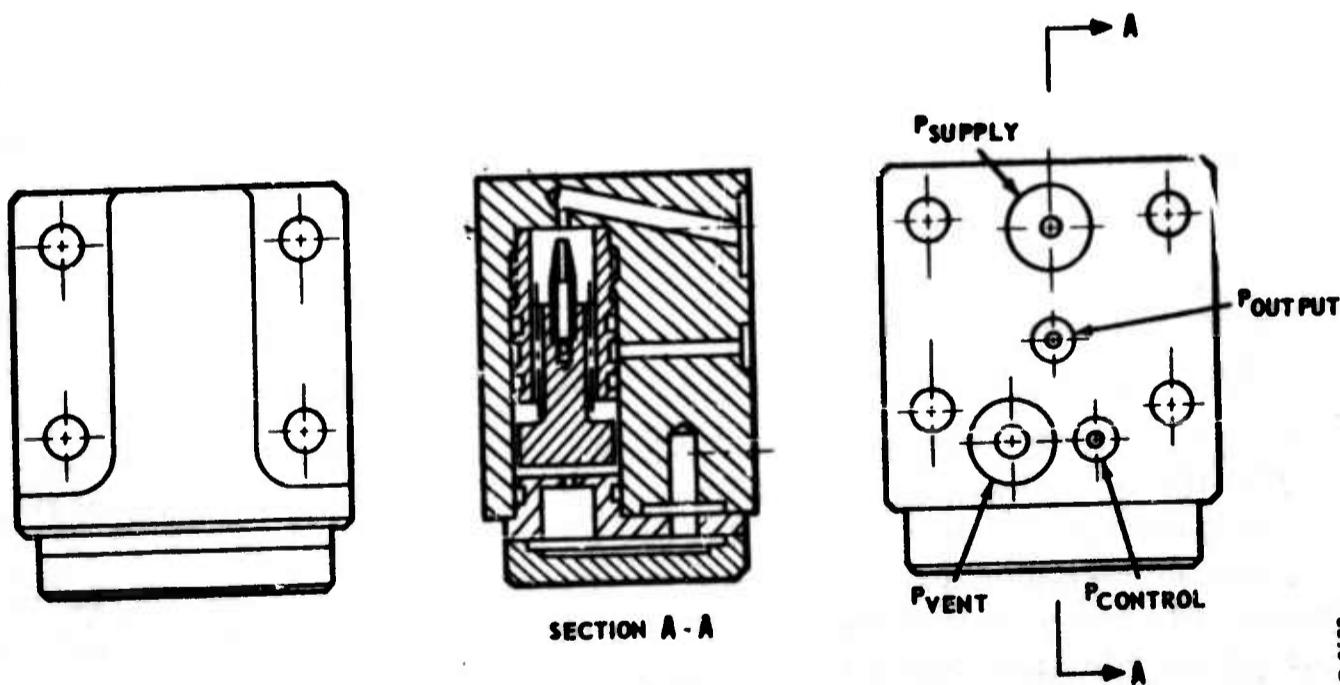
Venjet-Vortex Valve Preliminary Design Drawing
